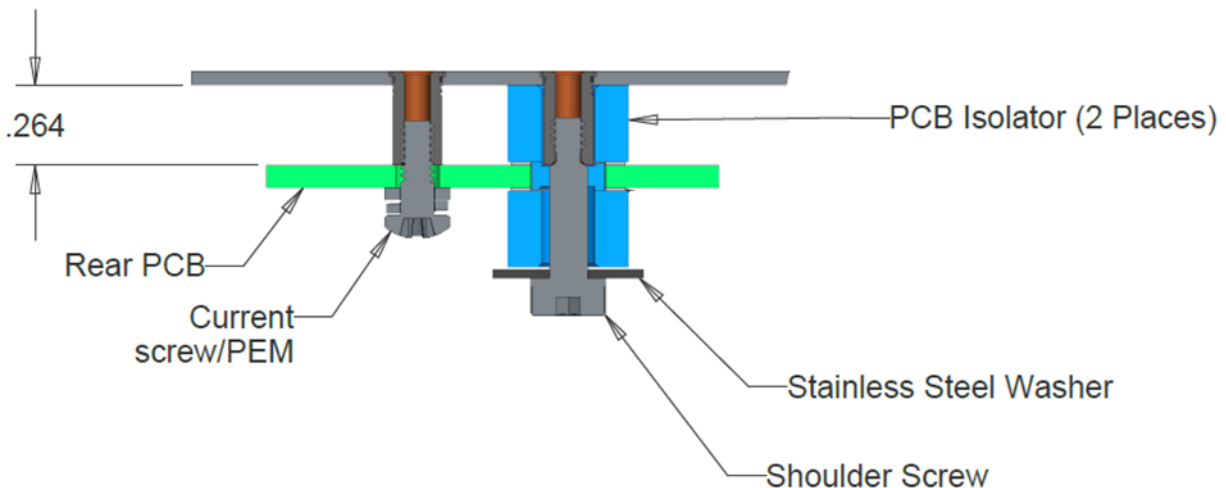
PCB Isolator Design vs. Rigid Connection
